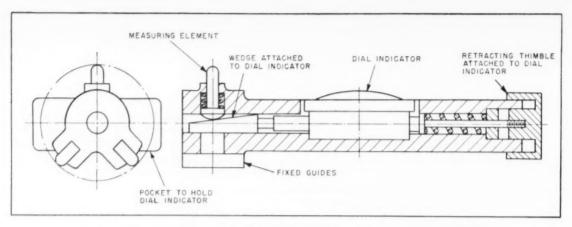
Where the gage tolerances would use up too great a part of the product tolerance, a dial indicator gage of the type shown may be more effective for checking internal dimensions.
